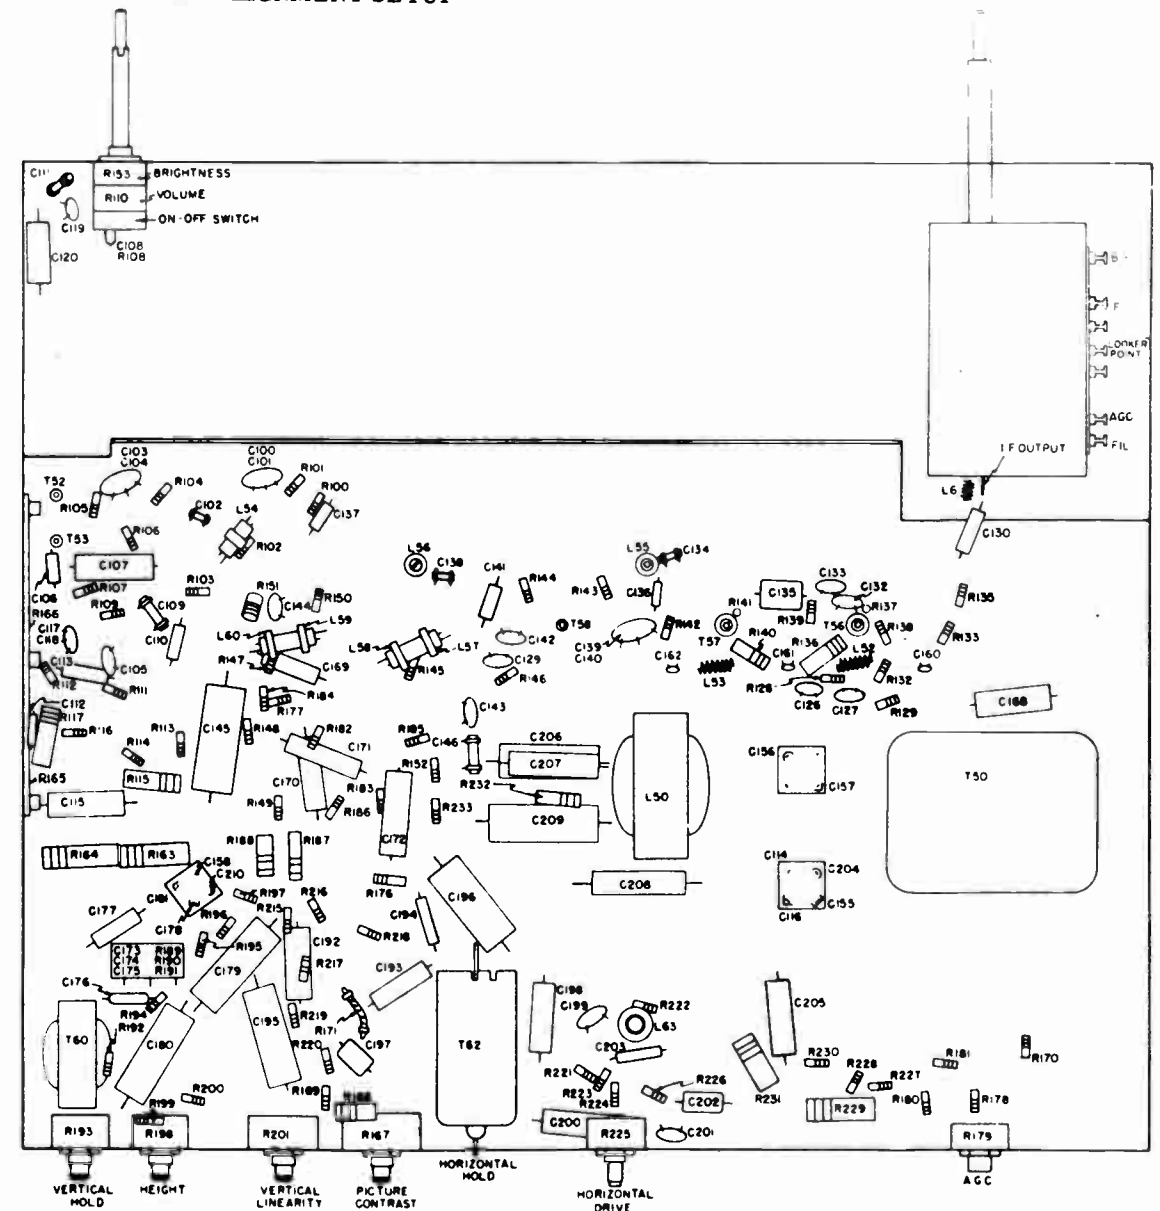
CHASSIS BOTTOM LAYOUT
